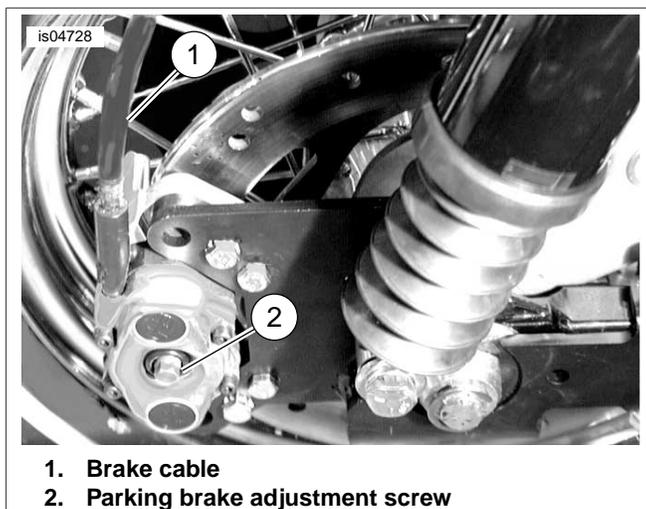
Route Parking Brake Cable (2007 and Earlier Shown)
